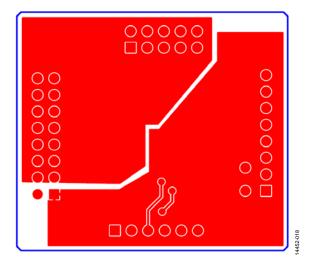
EVAL-AD5322DBZ Daughter Board Bottom Side Routing
